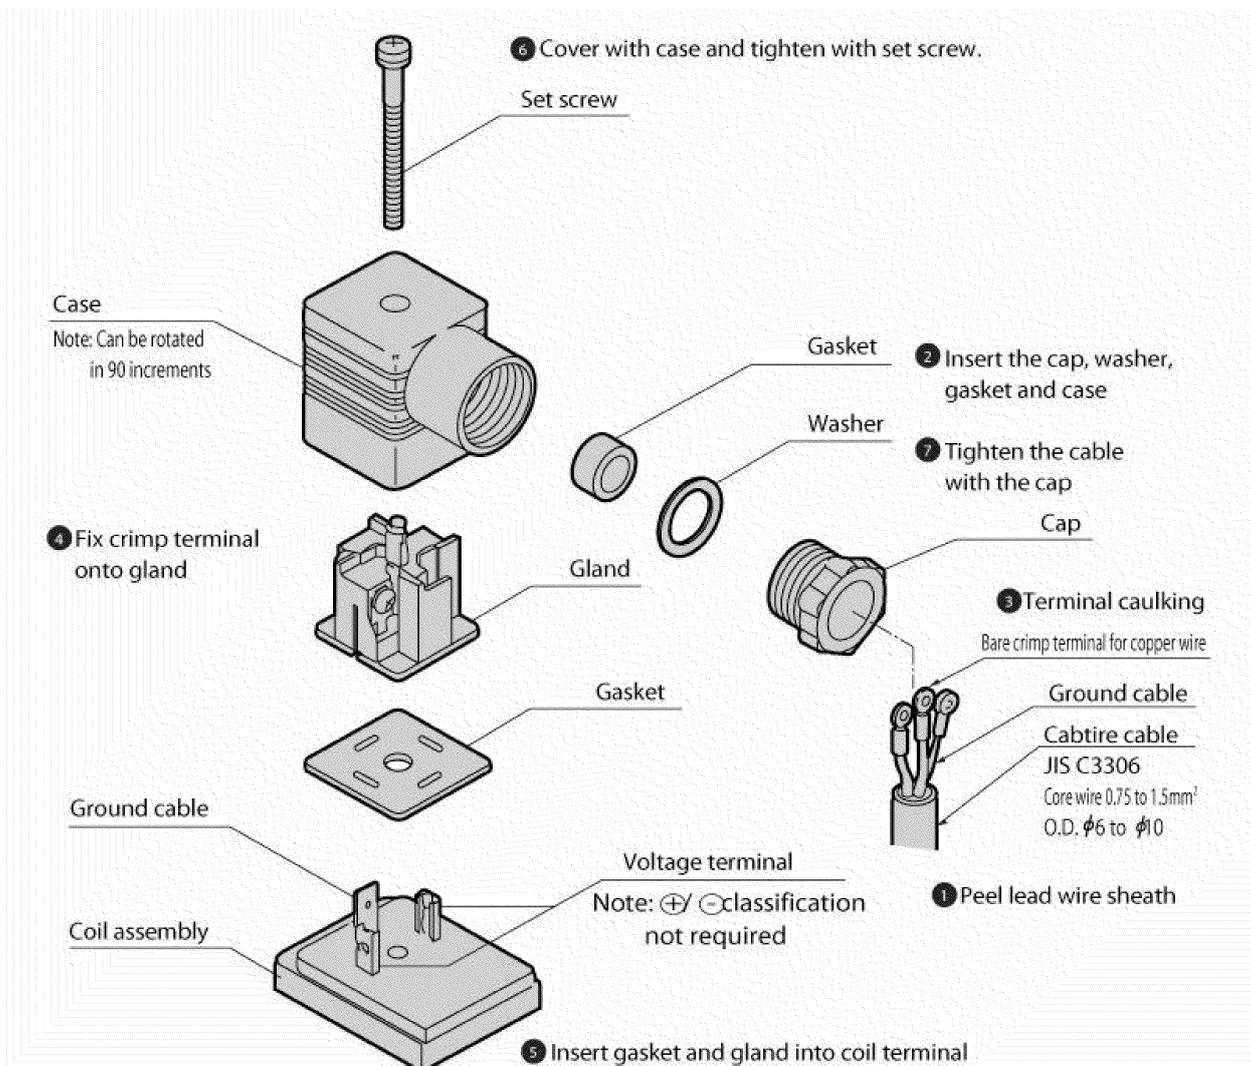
Wiring of the DIN terminal box (Pg9)
